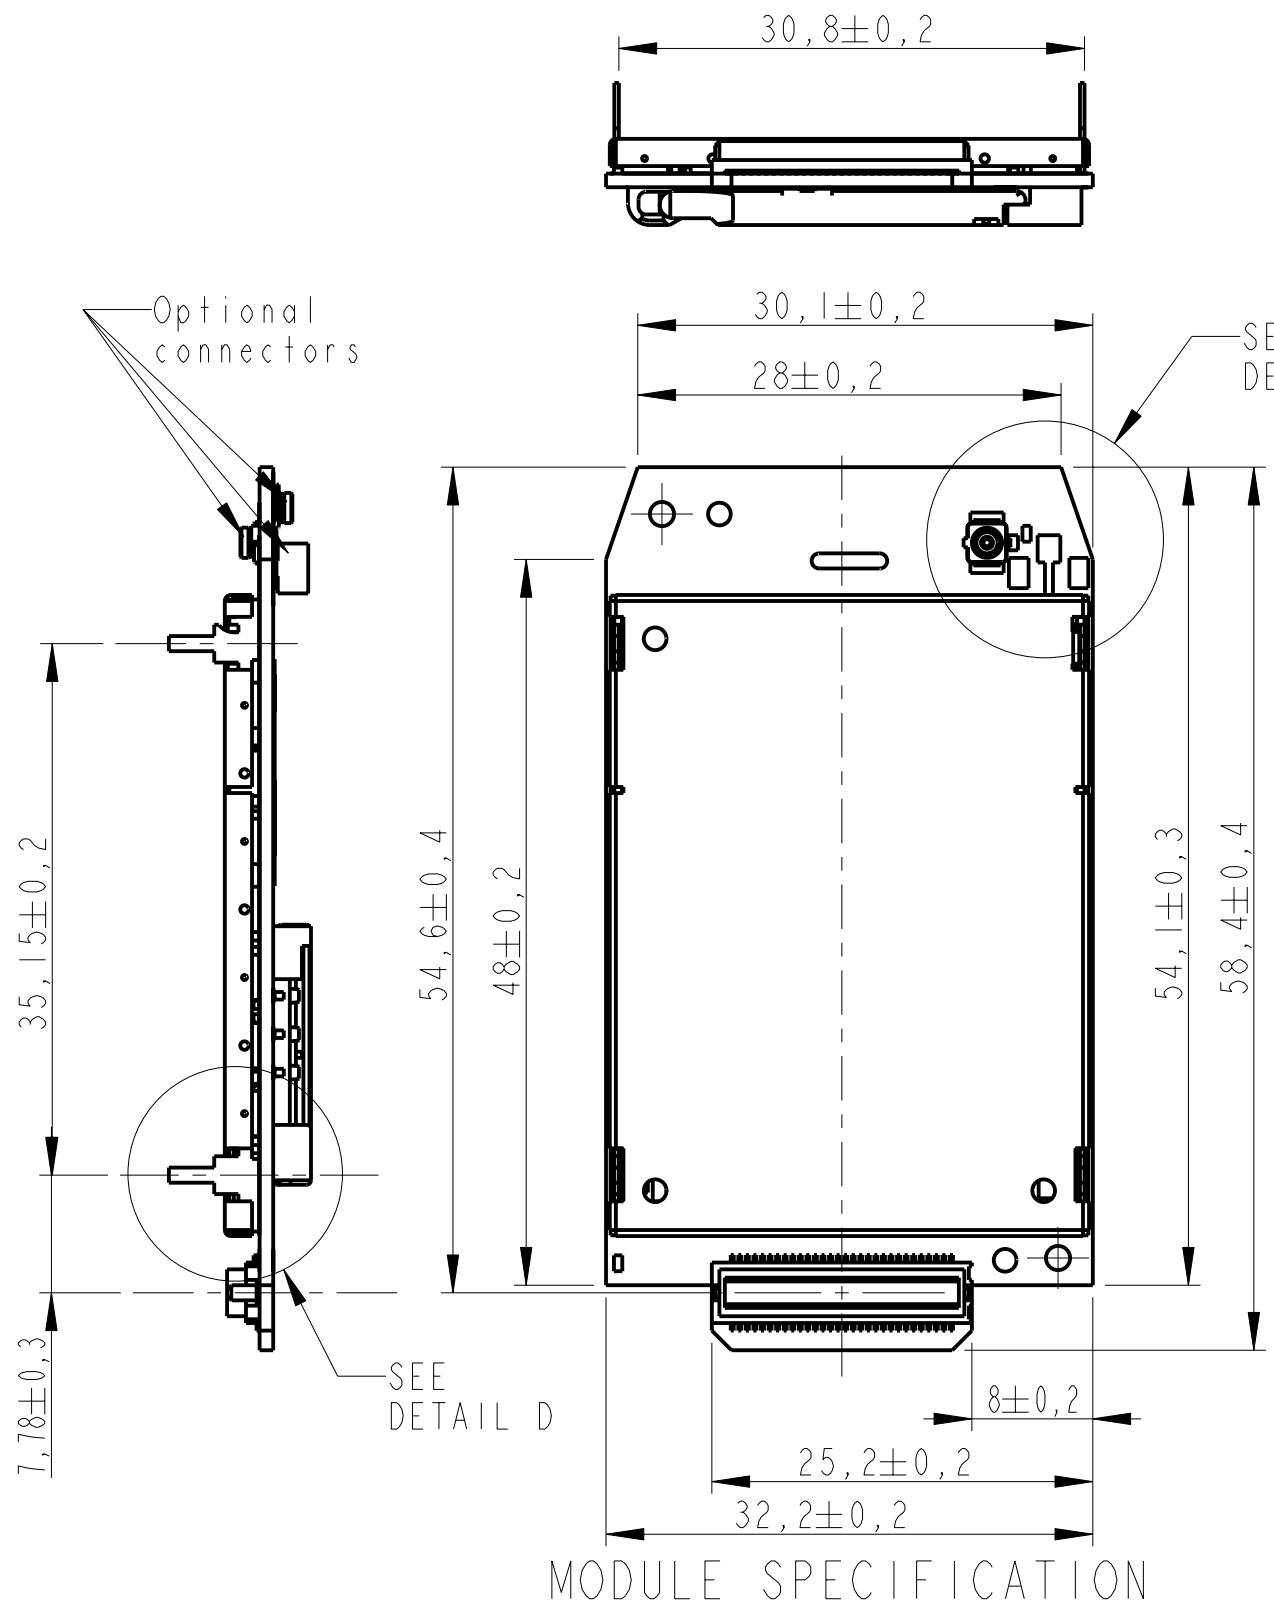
gives the overall dimensions of the Wireless CPU, with PCB dimensions and placement tolerances taken into account.
